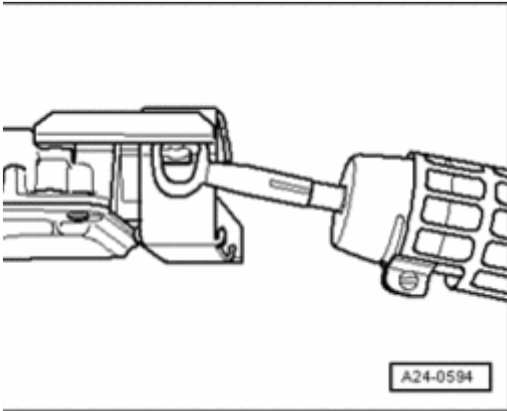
Using Heat Gun To Direct Heat Gun Nozzle At Shear Bolt Of Retaining Tab
